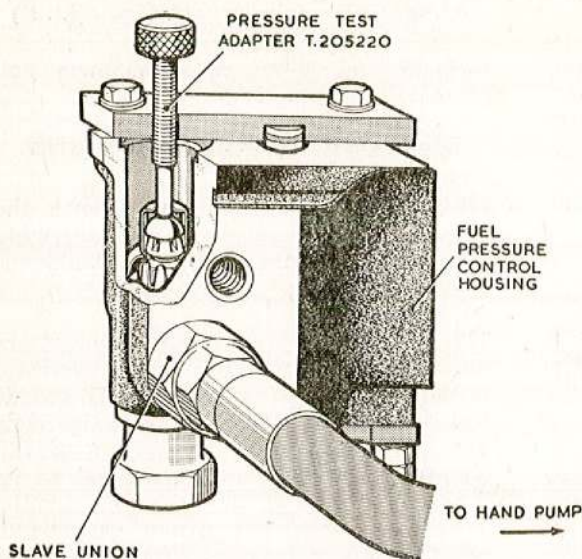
Pressure testing the servo valve, fuel pressure control assembly
